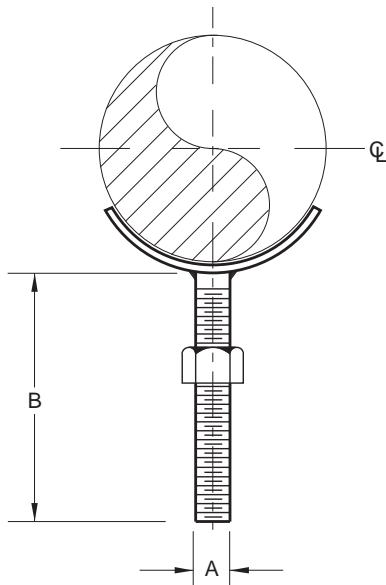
ADJUSTABLE PIPE SUPPORT
